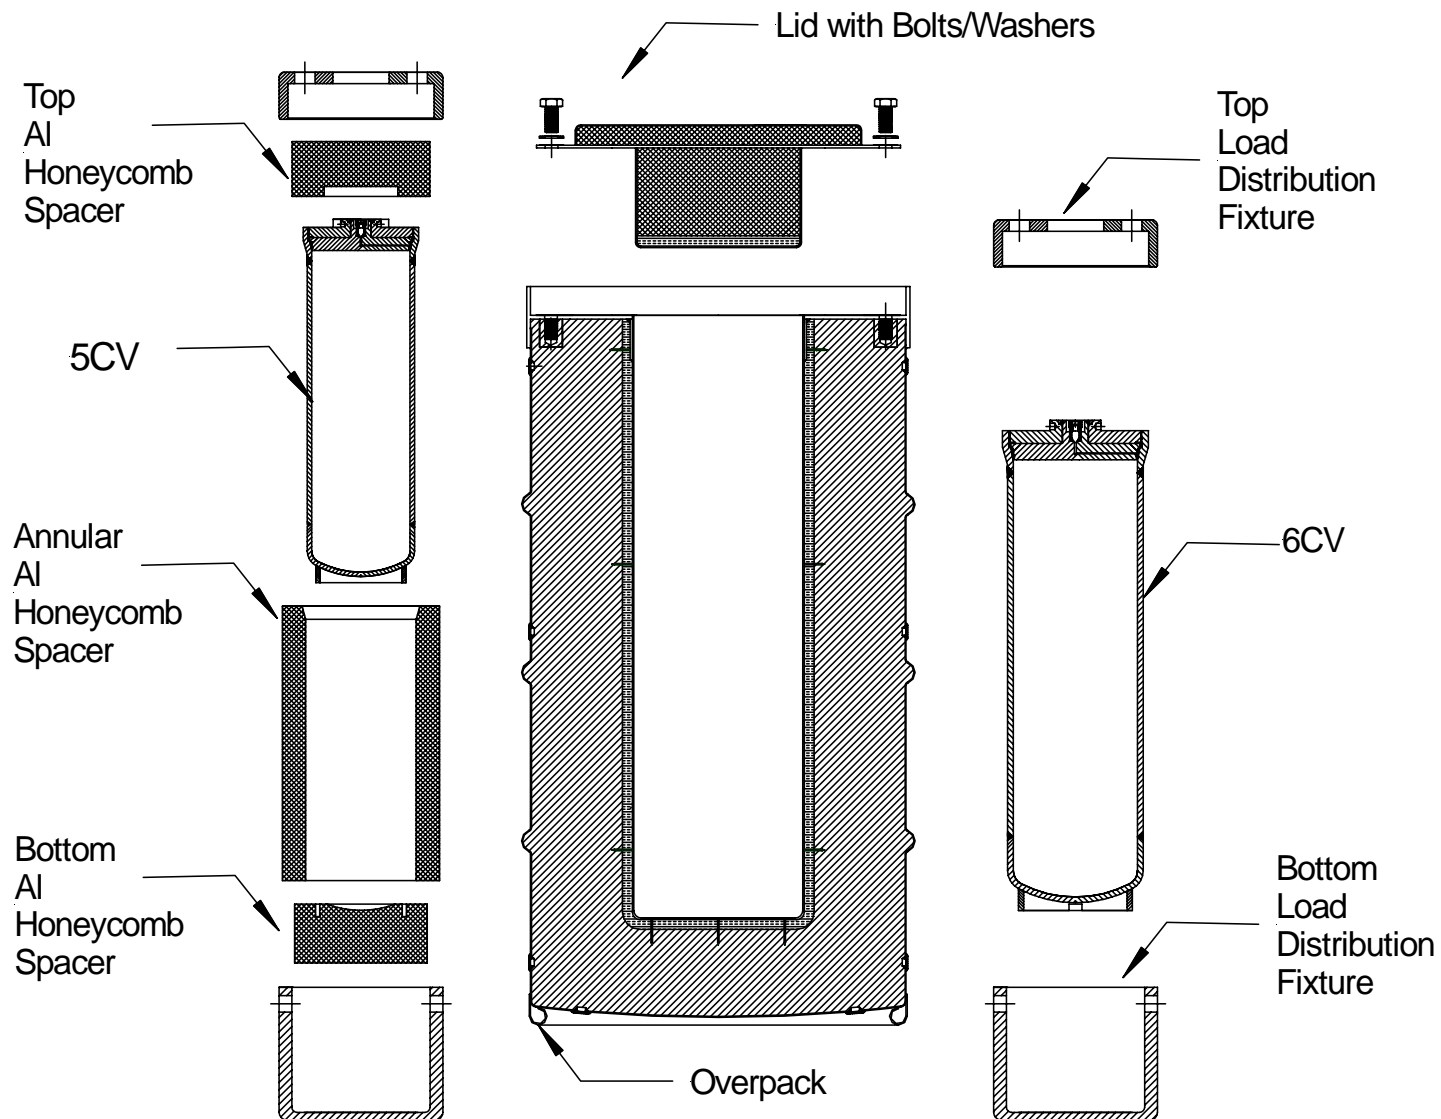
Exploded View of the 9977 with a 5-inch and 6-inch Diameter Containment Vessels
